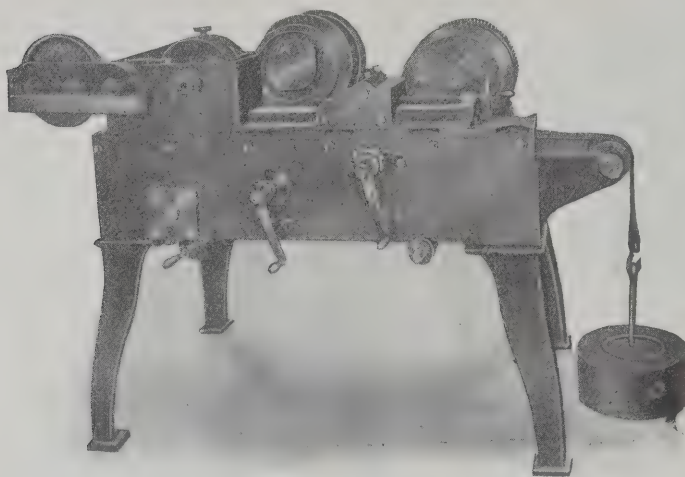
The Rowbottom Universal Cam Cutting Machine
